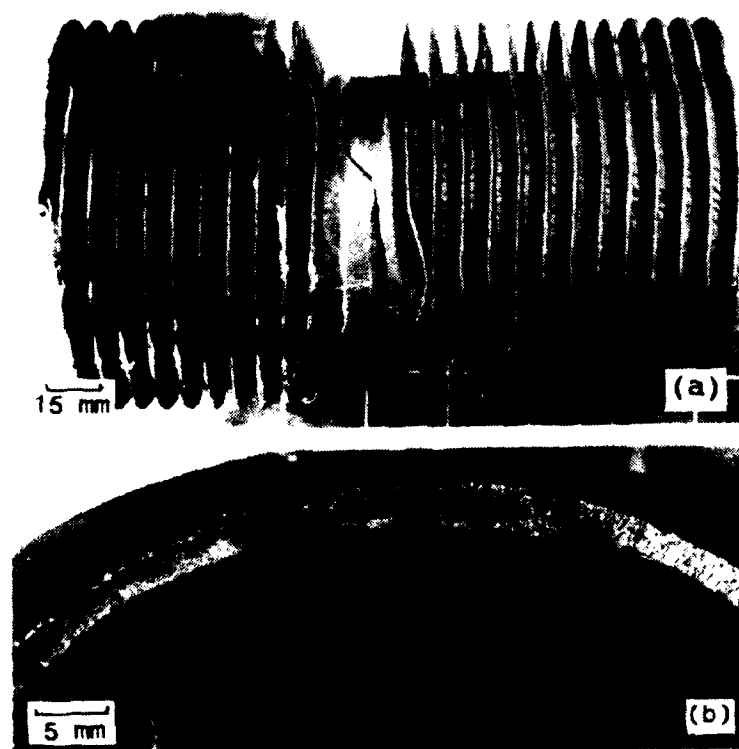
Photographs Showing : (a) Fractured Finned Tube from Unit 1; and (b) Fracture Surface of the Failed Tube.
